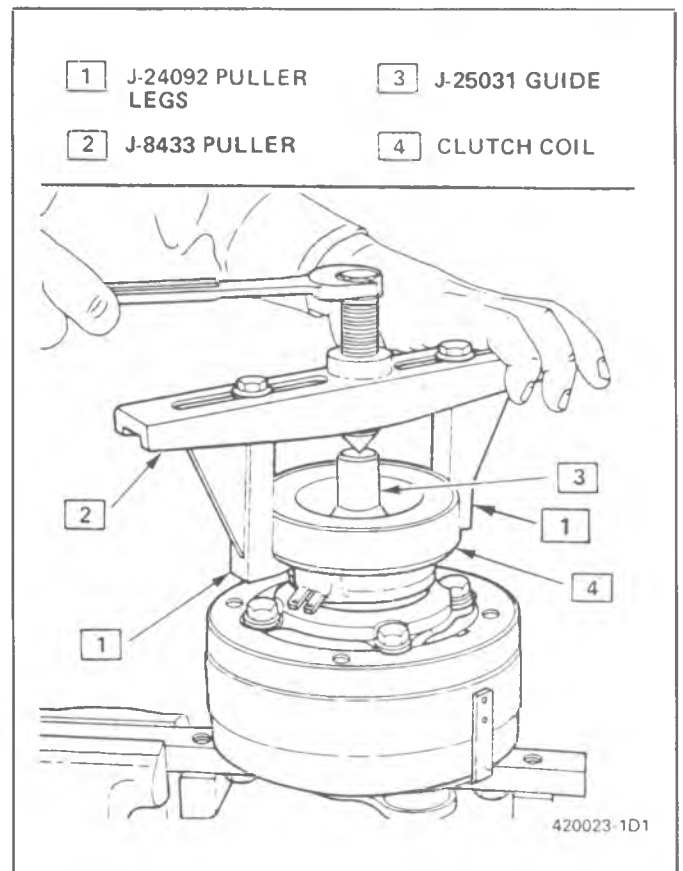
D1-23 Removing Poly-Groove Clutch Coil
